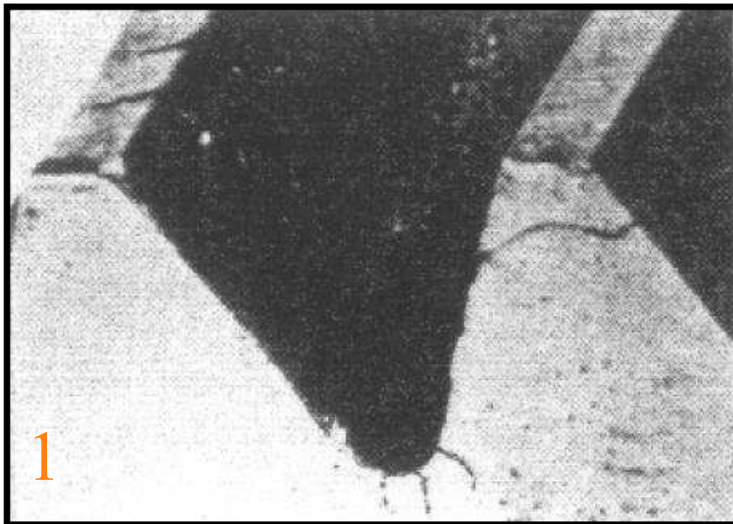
Fatigue Crack in Gear Tooth Root Fillet.
